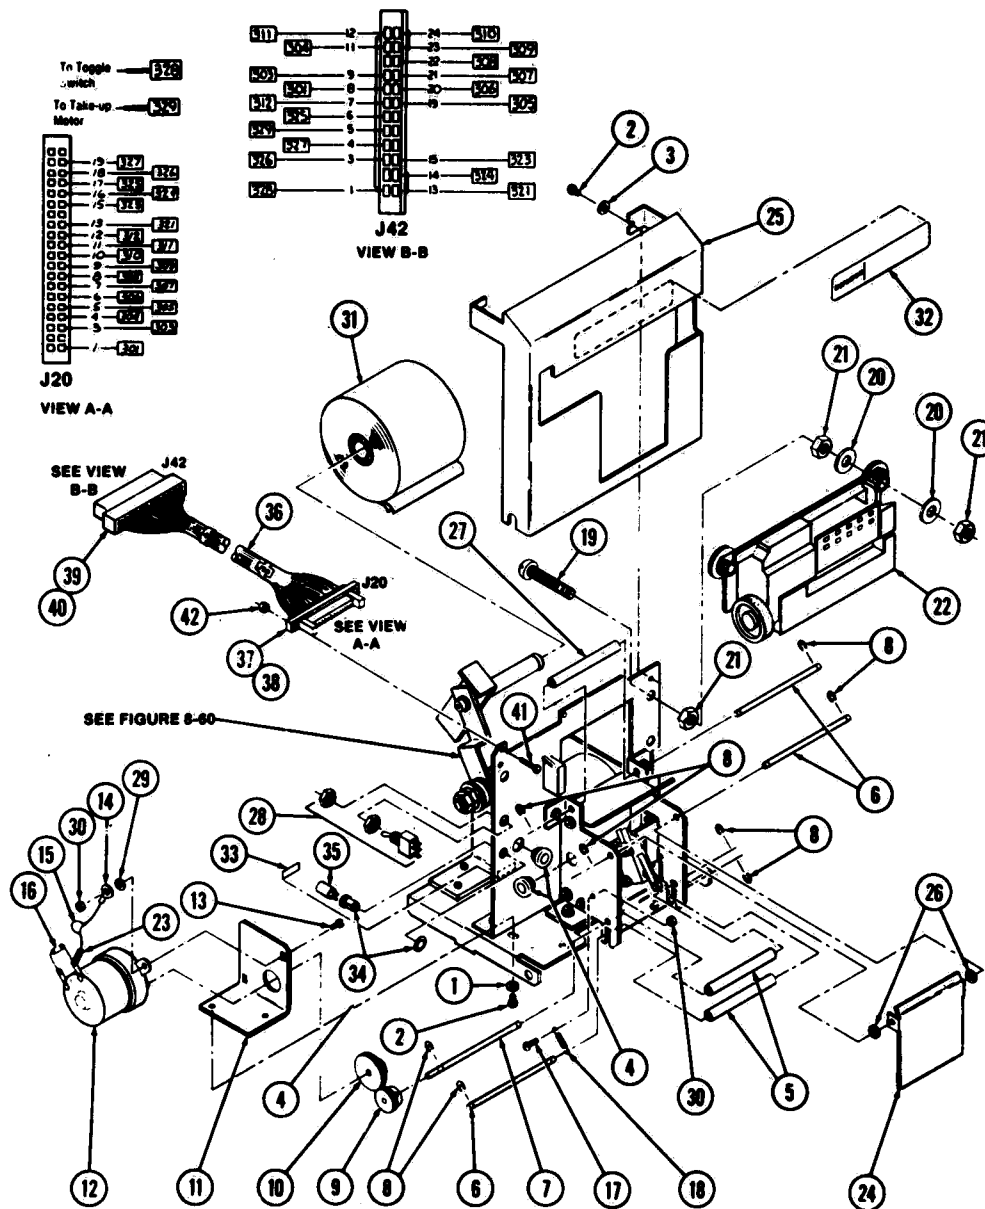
PRINTCON PRINTER ASSEMBLY, Units Before 6/85
